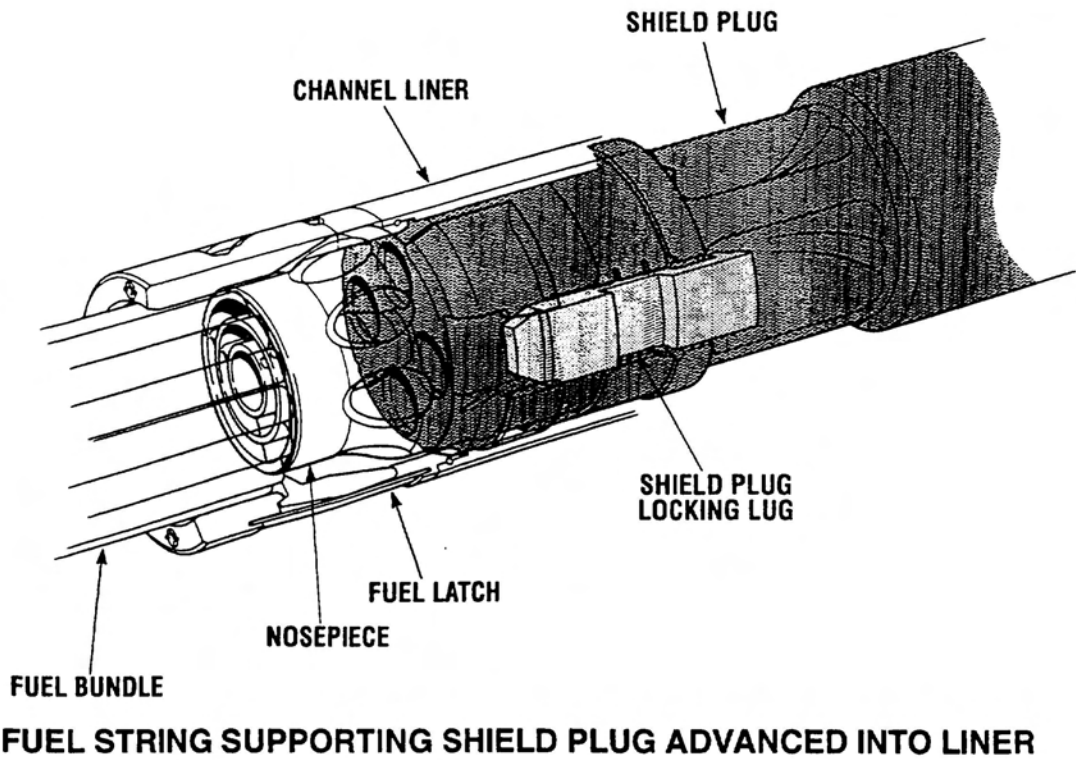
Fuel String Supporting Shield Plug - Unlocked
